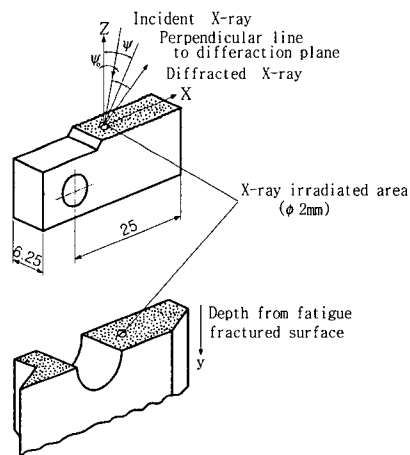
Schematic illustration of X-ray irradiated area on fatigue fractured surface of 12% Cr steel
